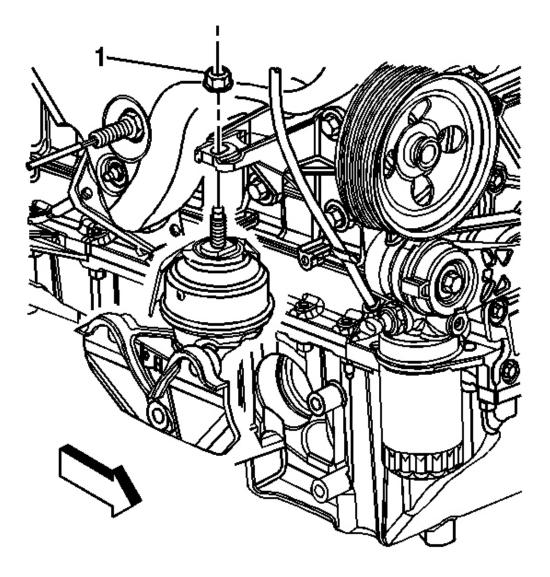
View Of Upper Engine Mount Nuts Courtesy of GENERAL MOTORS CORP.
